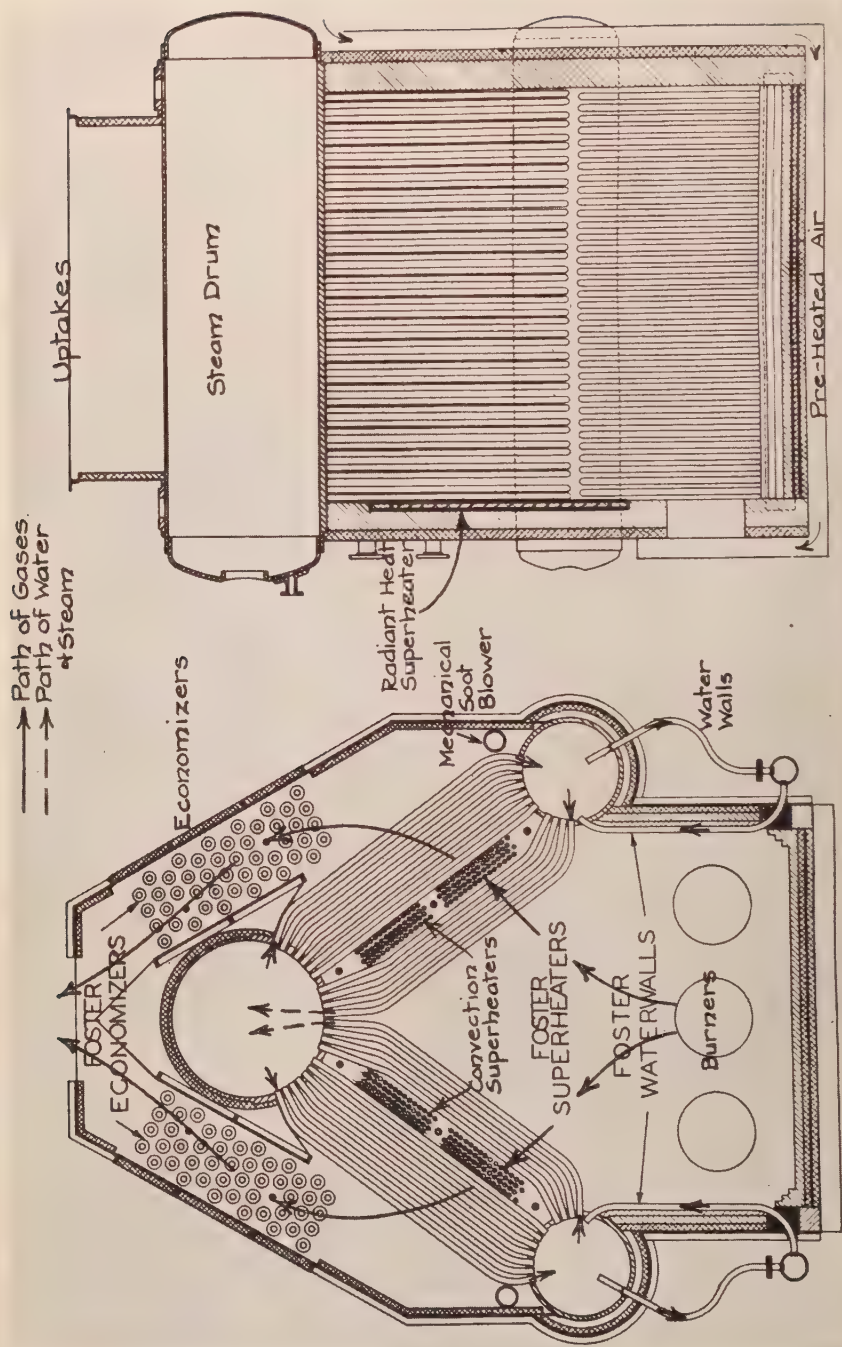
New "A" type Foster marine steam generator consisting of "A" type boiler,
